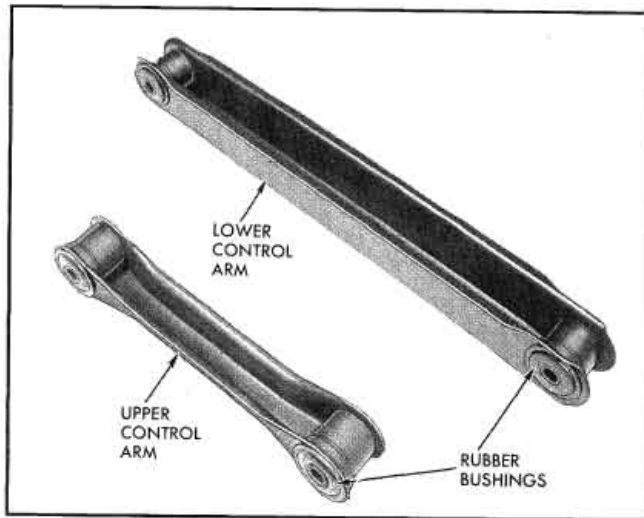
Rear Upper and Lower Control Arm Bushings
